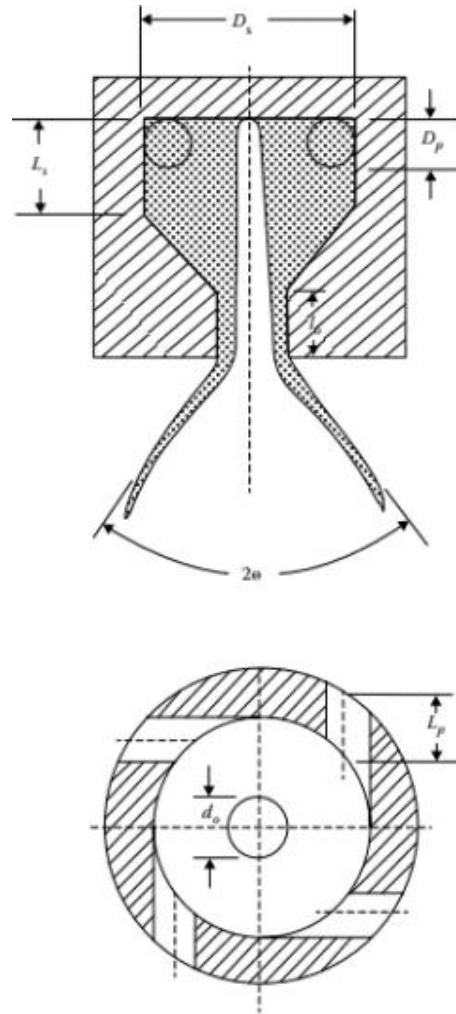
Pressure Swirl Atomizer Cross-Sections and Dimensions [23]
